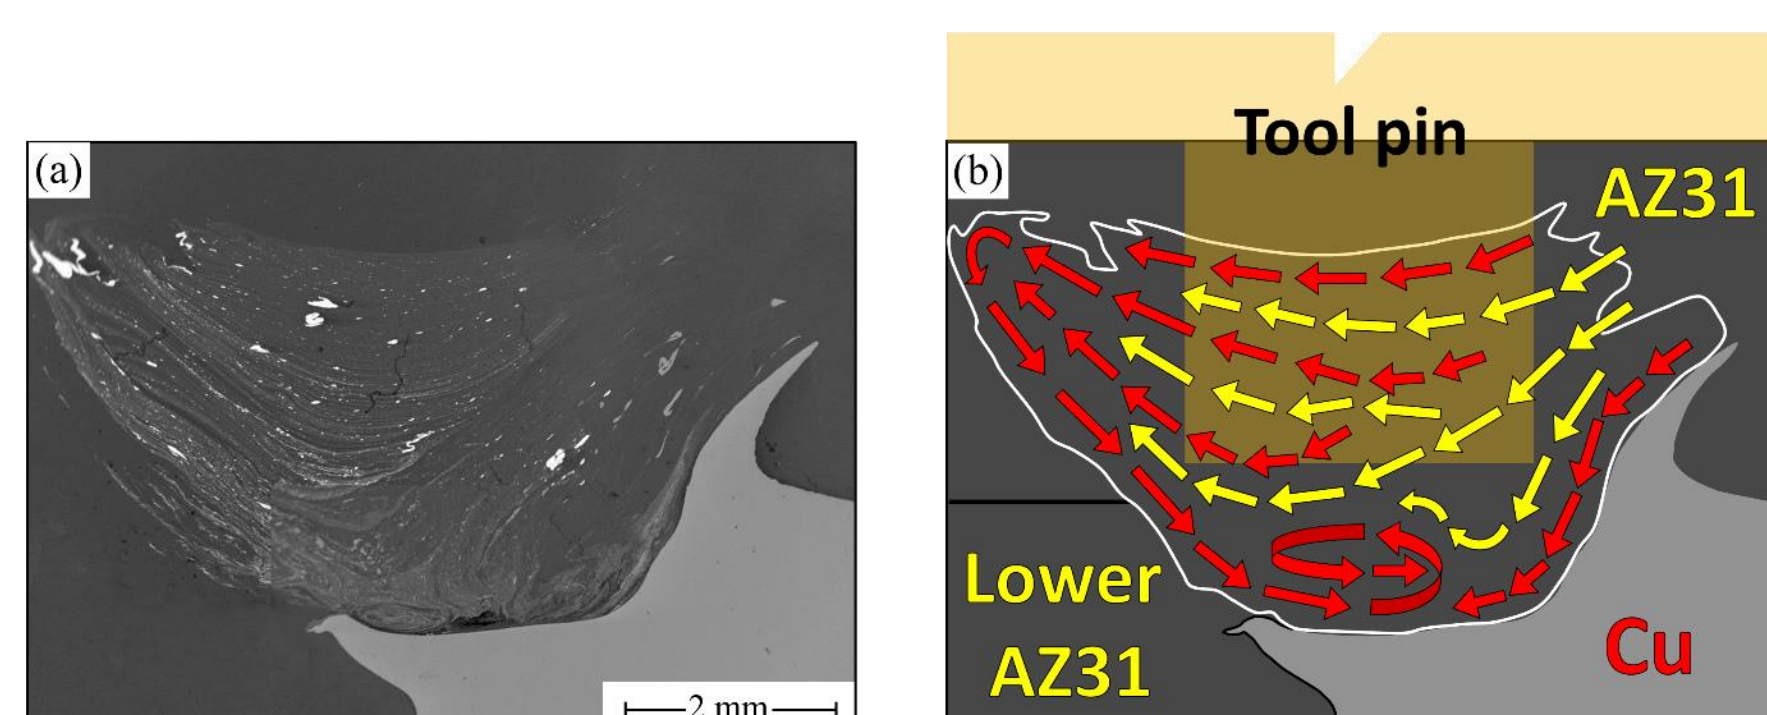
(a) Macrograph of the weld. (b) The pattern of material flow.
